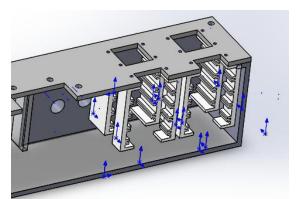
Cross Sectional View of Kit 1 with PCB holders Mounted to Sensors Section in SolidWorks
